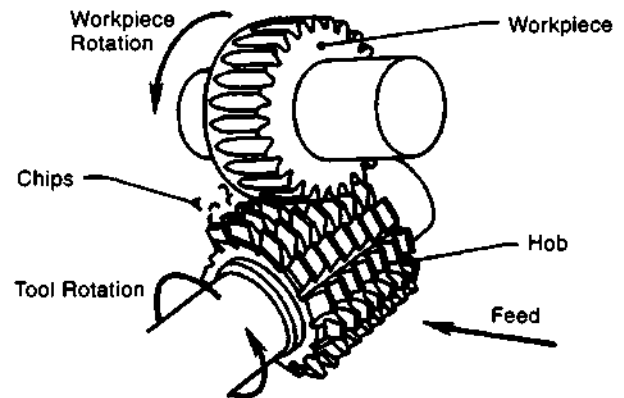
Machining a spur gear by gear hobbing. The rotation of the hob (cutting tool) and the gear blank (workpiece) is synchronized and continuous. (From Todd, Allen and Alting, *Manufacturing Processes Reference Guide*, Industrial Press, 1994.)
